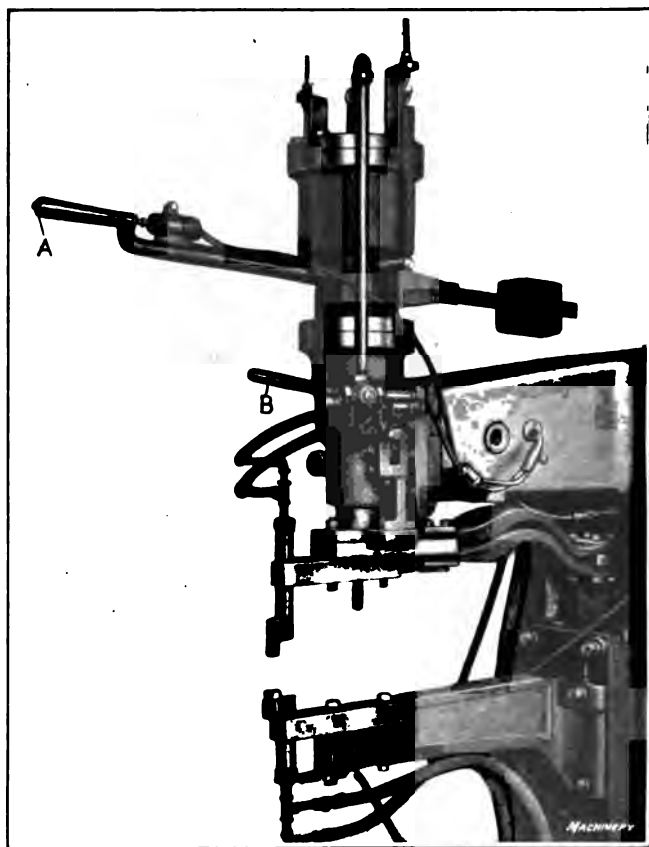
Electric Welding Machine fitted with Air Cylinder for Riveting
